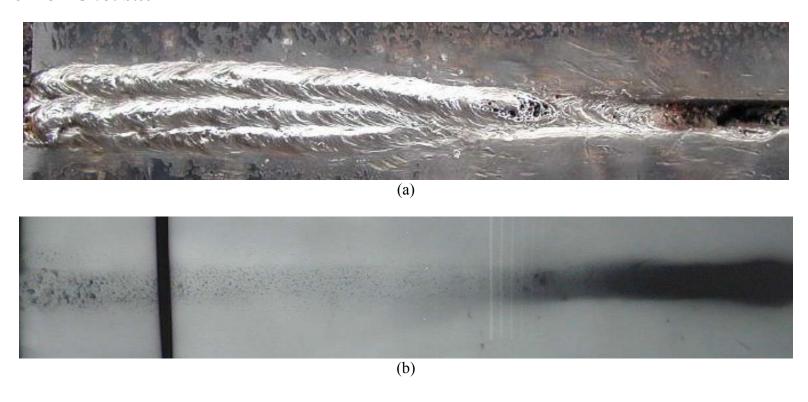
(a) V-groove wet weld deposited with E6013 electrode type on A572 Gr. 50 steel at 50 m and (b) its radiographic image.
